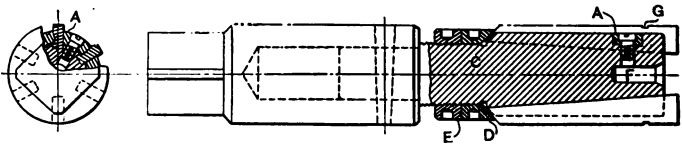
Adjustable Hand Reamer with Inserted Blades'
